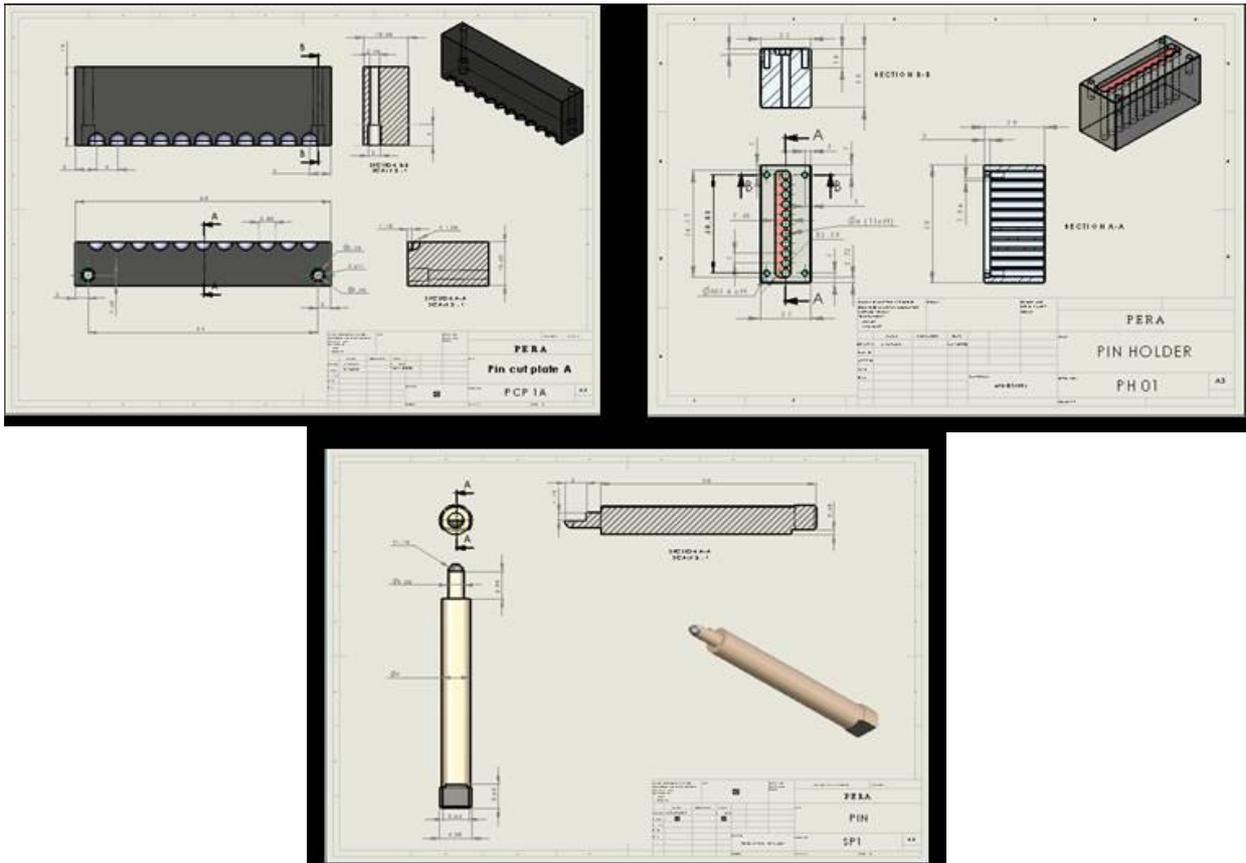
CAD drawings showing the dimple tool for the formation of the semi-shears.
